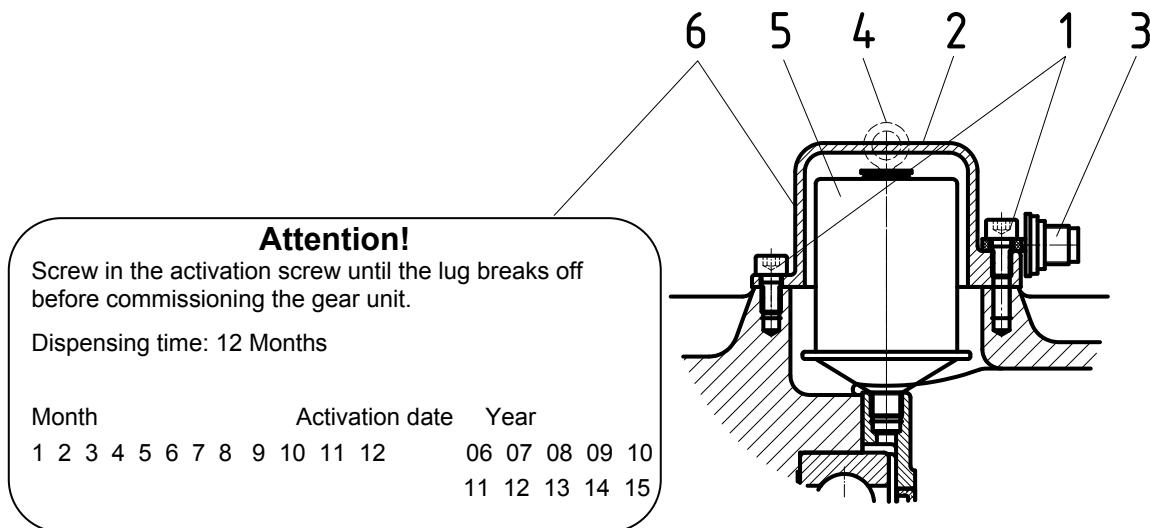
Activating the automatic lubricant dispenser with standard motor mounting
